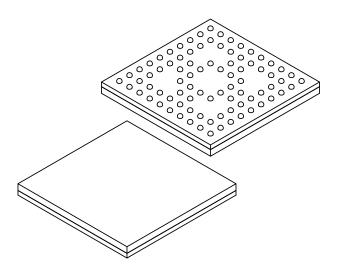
2ZW Package Dimensions, Sheet 2
